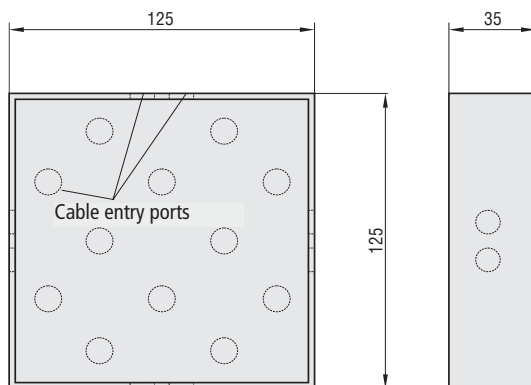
Installation drawing of flush-mounting box for RZA 142 UP
